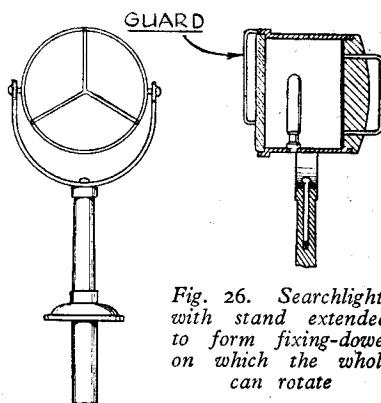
Searchlight, with stand extended to form fixing-dowel on which the whole can rotate
